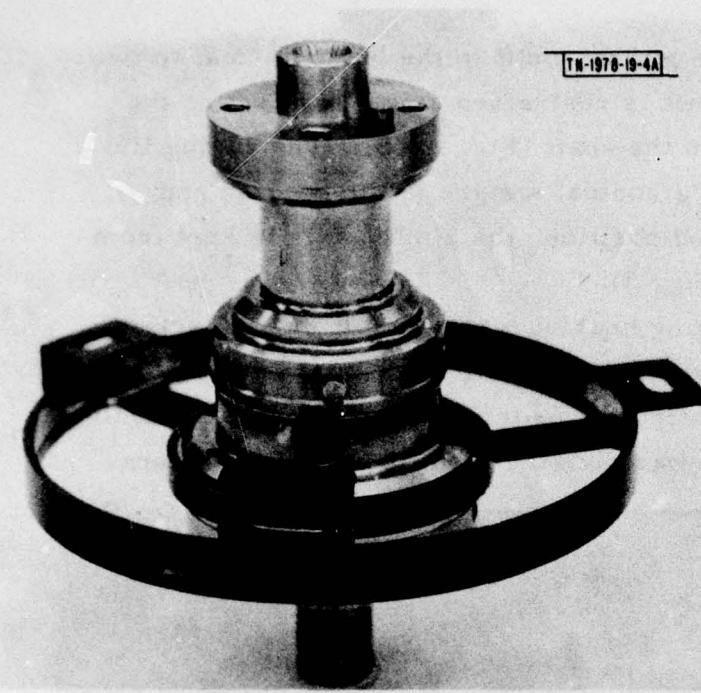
, b. Conical groove in gimbal shaft for caging links restrains shaft axially.
